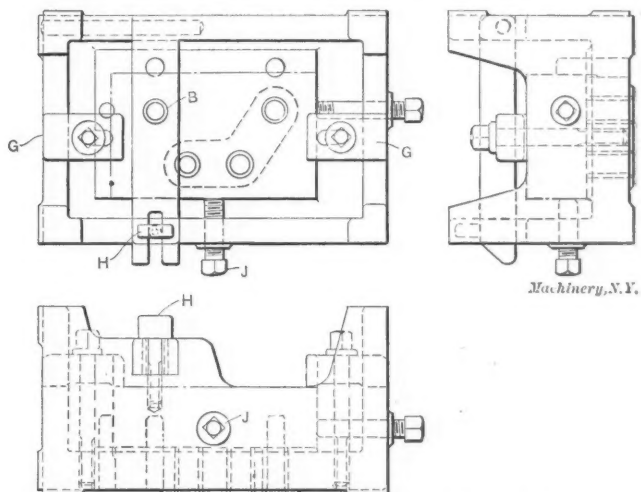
Jig where Thrust of Drilling Operation is taken by Clamps.
